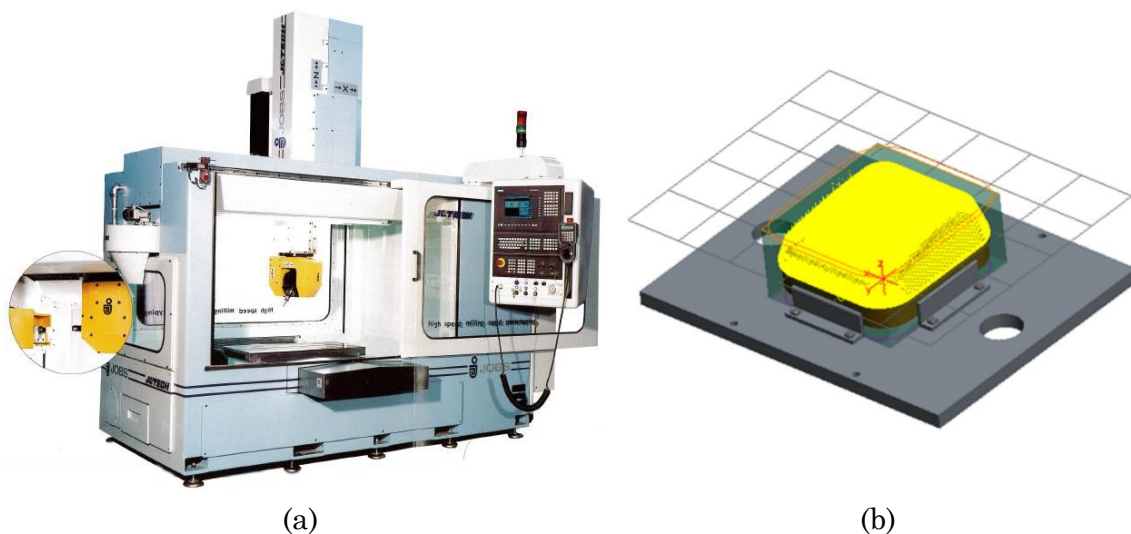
10: milling machine used for making the experimental rapid tools (a) and definition of the finishing operation in the CAM module of Pro-e (b).
